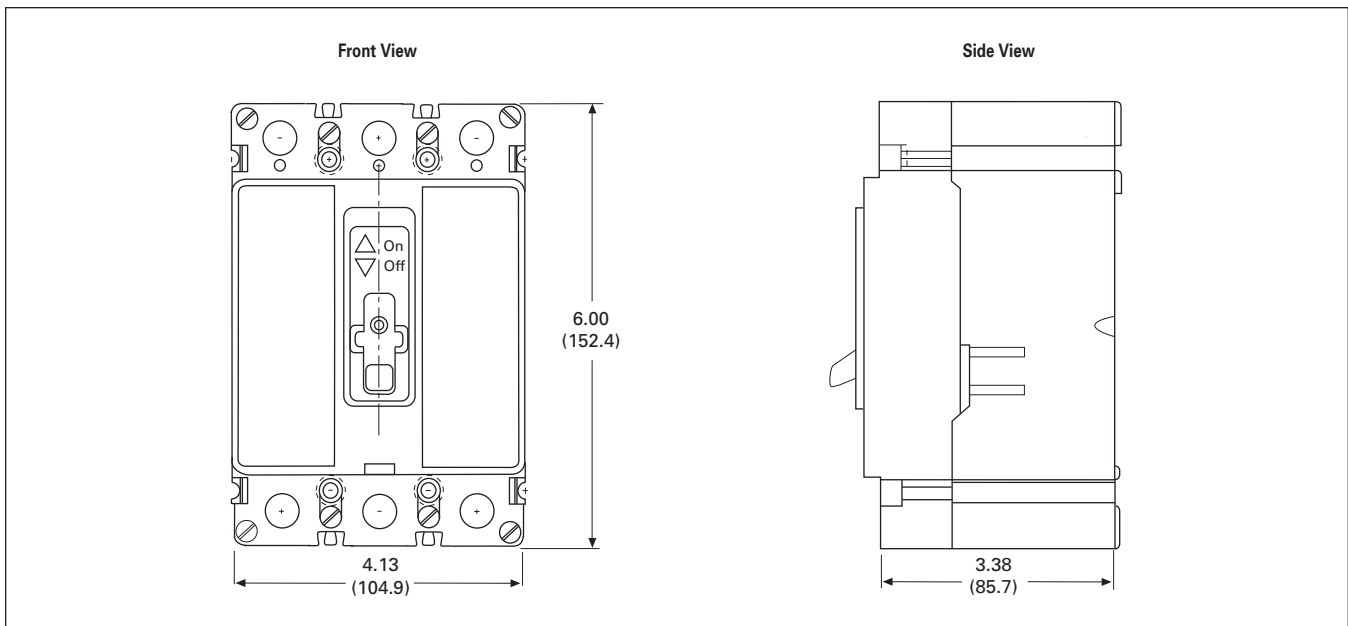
GHB-Frame, 3-Pole — Dimensions in Inches (mm)
